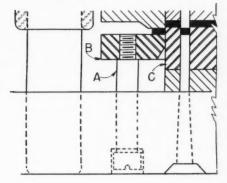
Drawing showing standard type stripper screw and stripper plate
